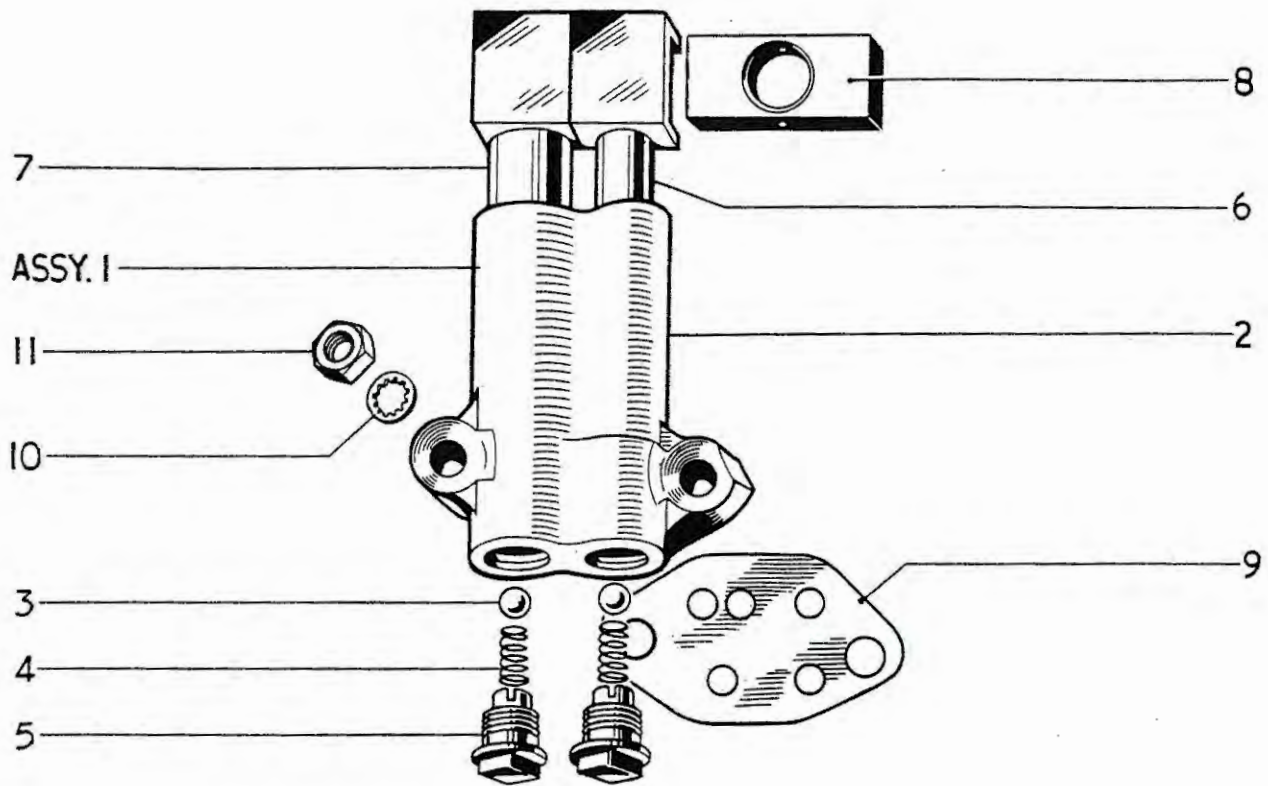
OIL PUMP, RELEASE VALVE AND INLET MANIFOLD.
